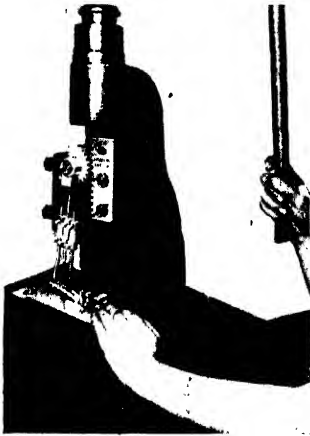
"MILLO" EJECTOR HAND-PRESS GUARD
